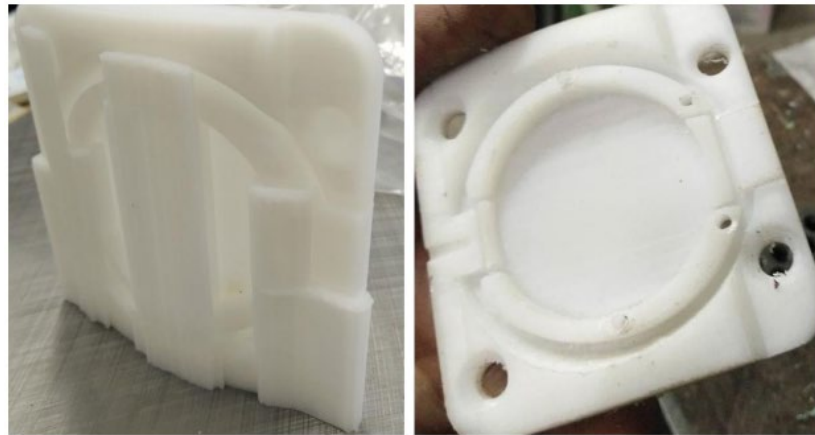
An example for mold inserts FFF 3D printed on the Zortrax M200 before and after the removal of support material.
